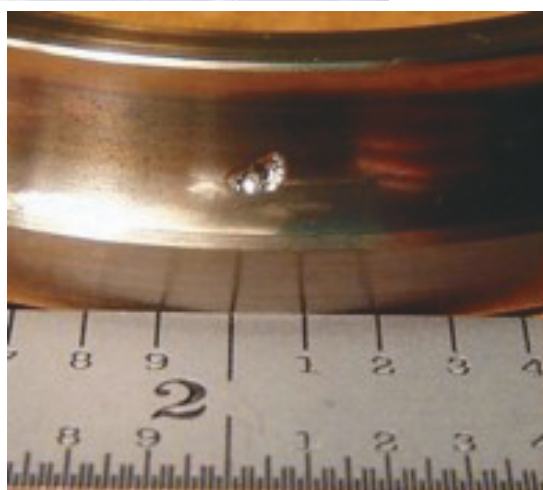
Initiation of fatigue in a ball bearing raceway due to RCF
